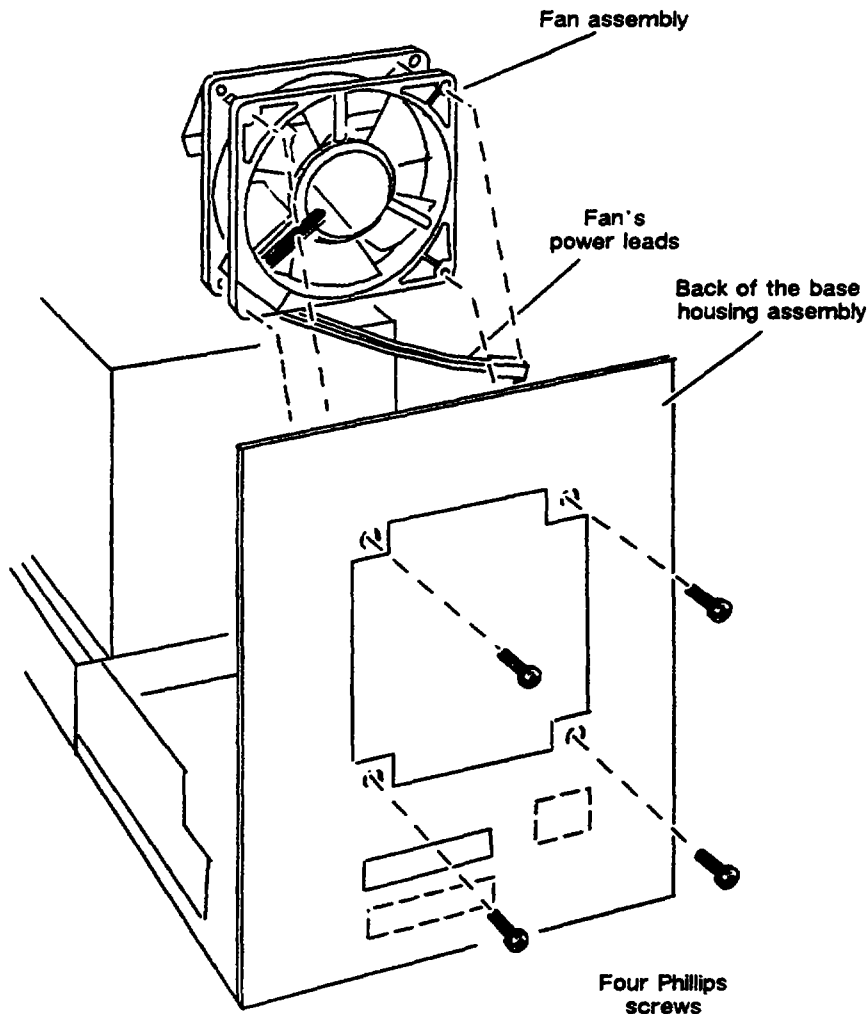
Attaching the Fan to the Back of the Subsystem
